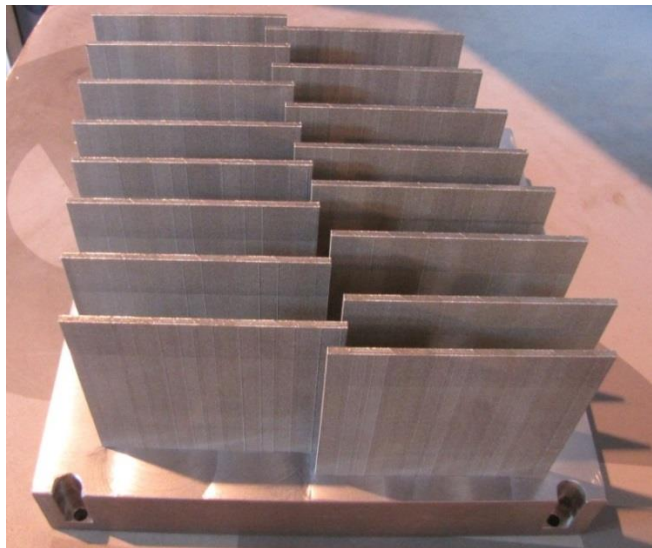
A set of test pieces after manufacturing, still attached to the building platform.
